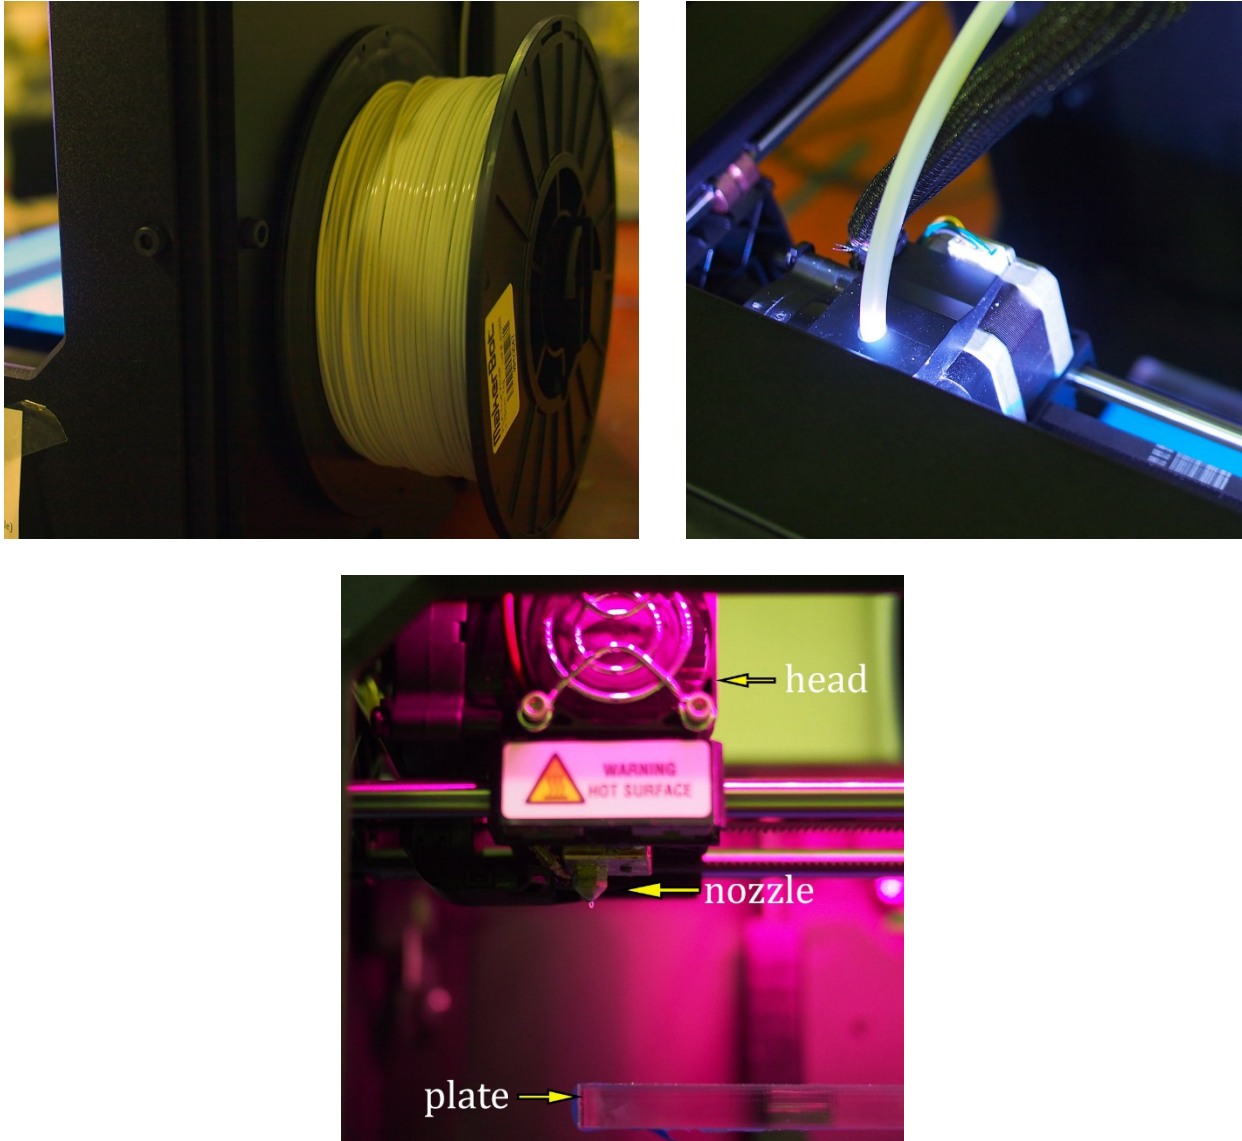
(a) A roll of PLA filament, (b) the hose which is linked to the head, and (c) The head, nozzle and construction plate of FDM printer.
